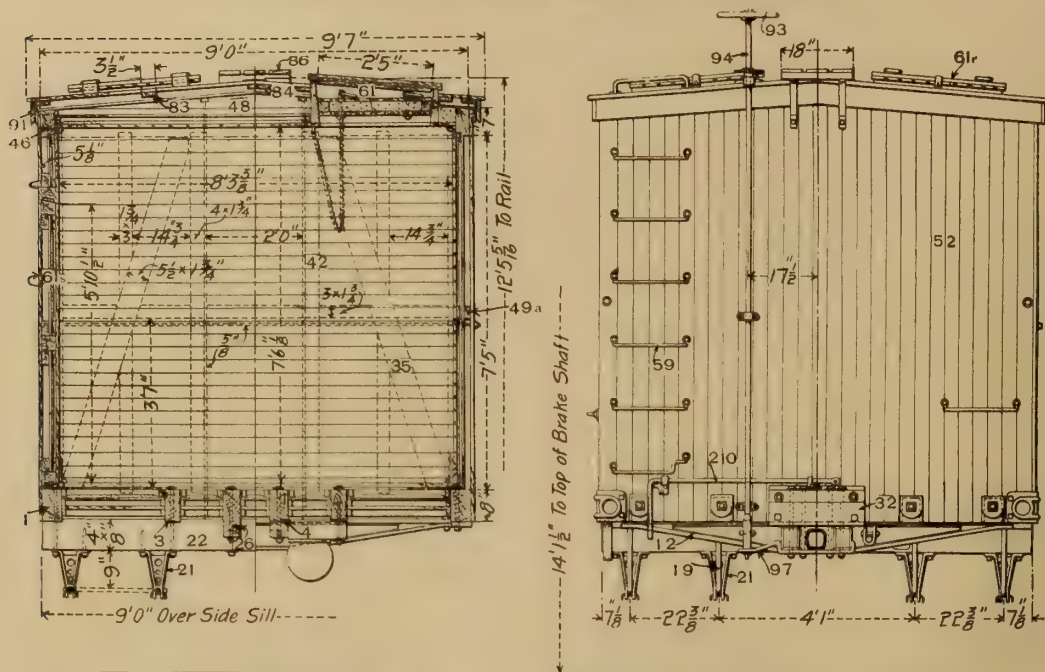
PLAN AND ELEVATION OF 41 FT. BOX CAR. C. B. & Q. CAPACITY, 80,000 LBS.
